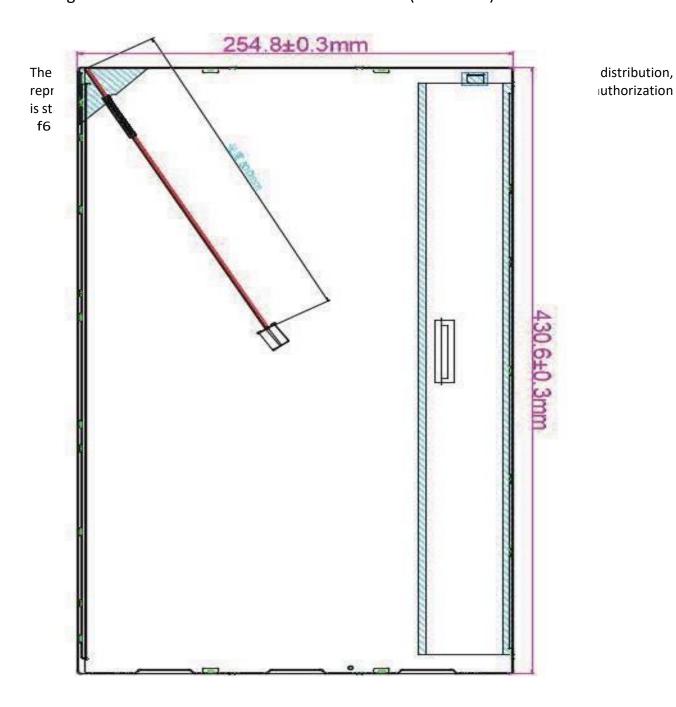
TFT-LCD Module Outline Dimensions (Front view)
